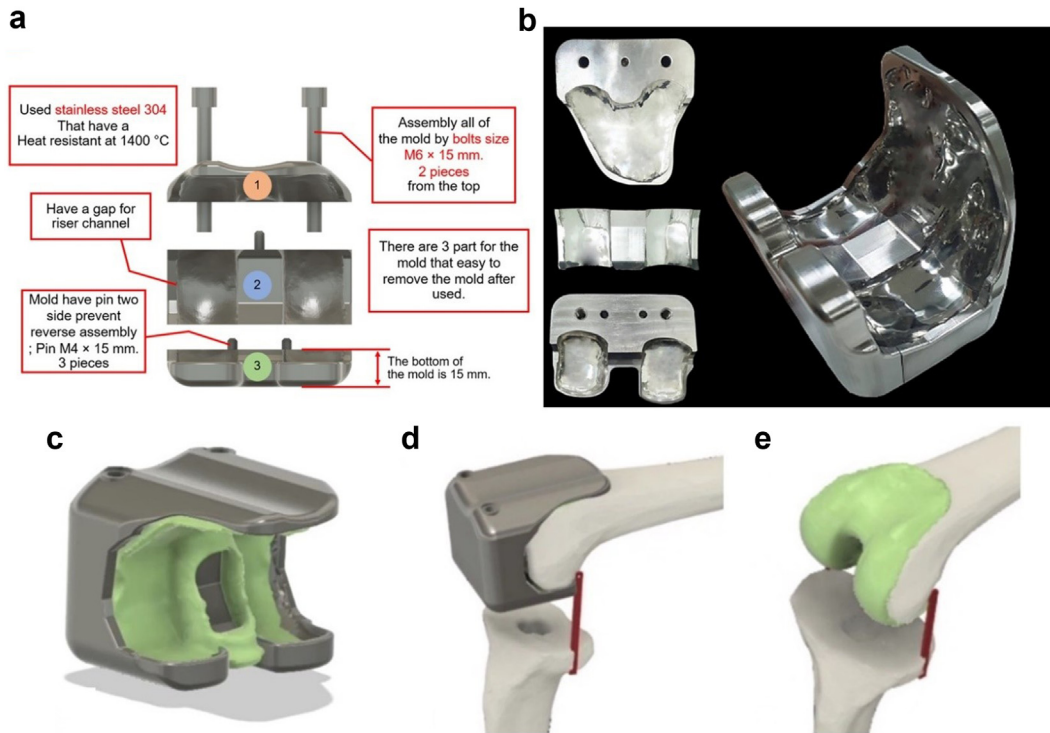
(a) Three-dimensional design of an on-bone femoral spacer molding device. (b) The device after complete manufacture. (c) Application of the on-bone femoral spacer molding block involves applying bone cement to the molding block. (d) The molding block is then gently compressed onto the prepared distal femur. (e) Once the bone cement has fully settled, the molding block is removed by separating the front, middle, and back parts.
